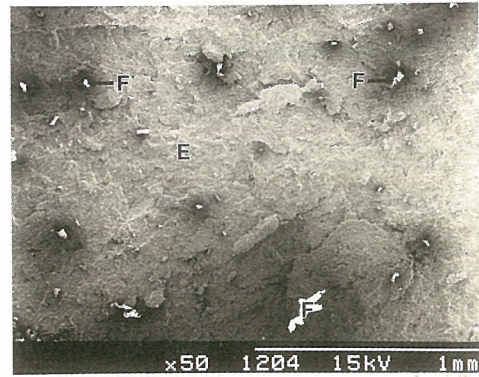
Surface of a fracture specimen showing a flux inclusion body (F) and equiaxial grains (E) of the parental metal soldered at 1200 °C.
